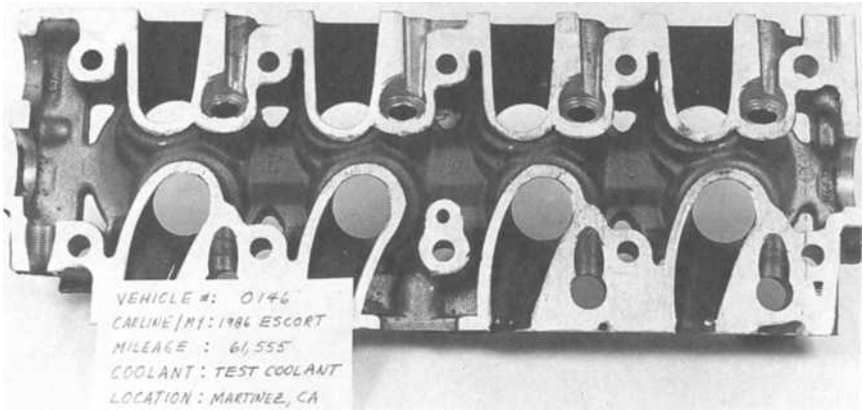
Cylinder head cooling jacket of Vehicle 0146.
